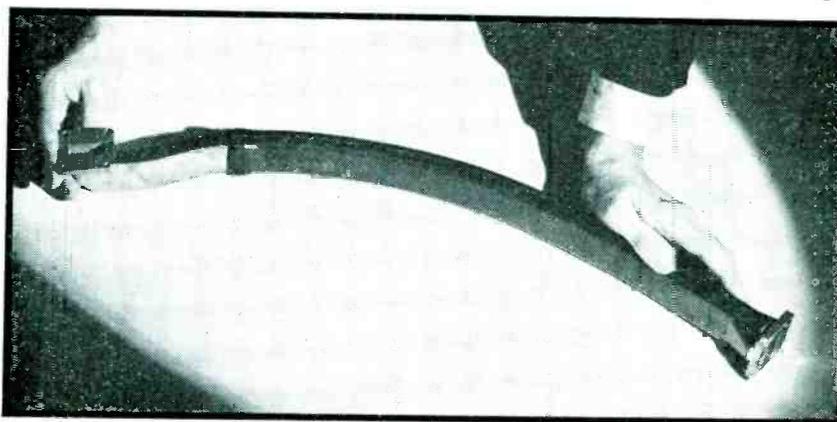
An assembly consisting of interlocked flexible wave guide hard-soldered to a rigid elbow
